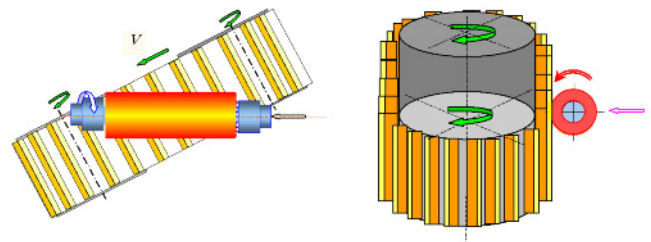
Schematic illustration of continuous broaching when removing defect layer with occluded sand from the outer surface of as-cast cylindrical billet in hot state
